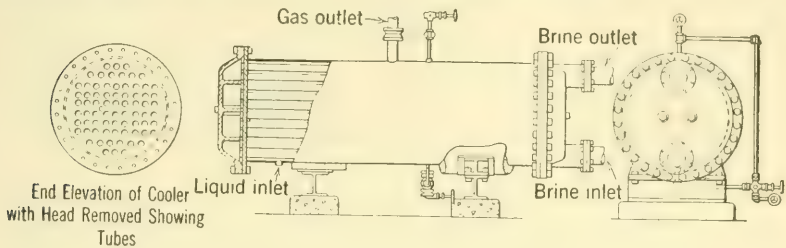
Shell and Tube Brine Cooler for Eight Passes.
